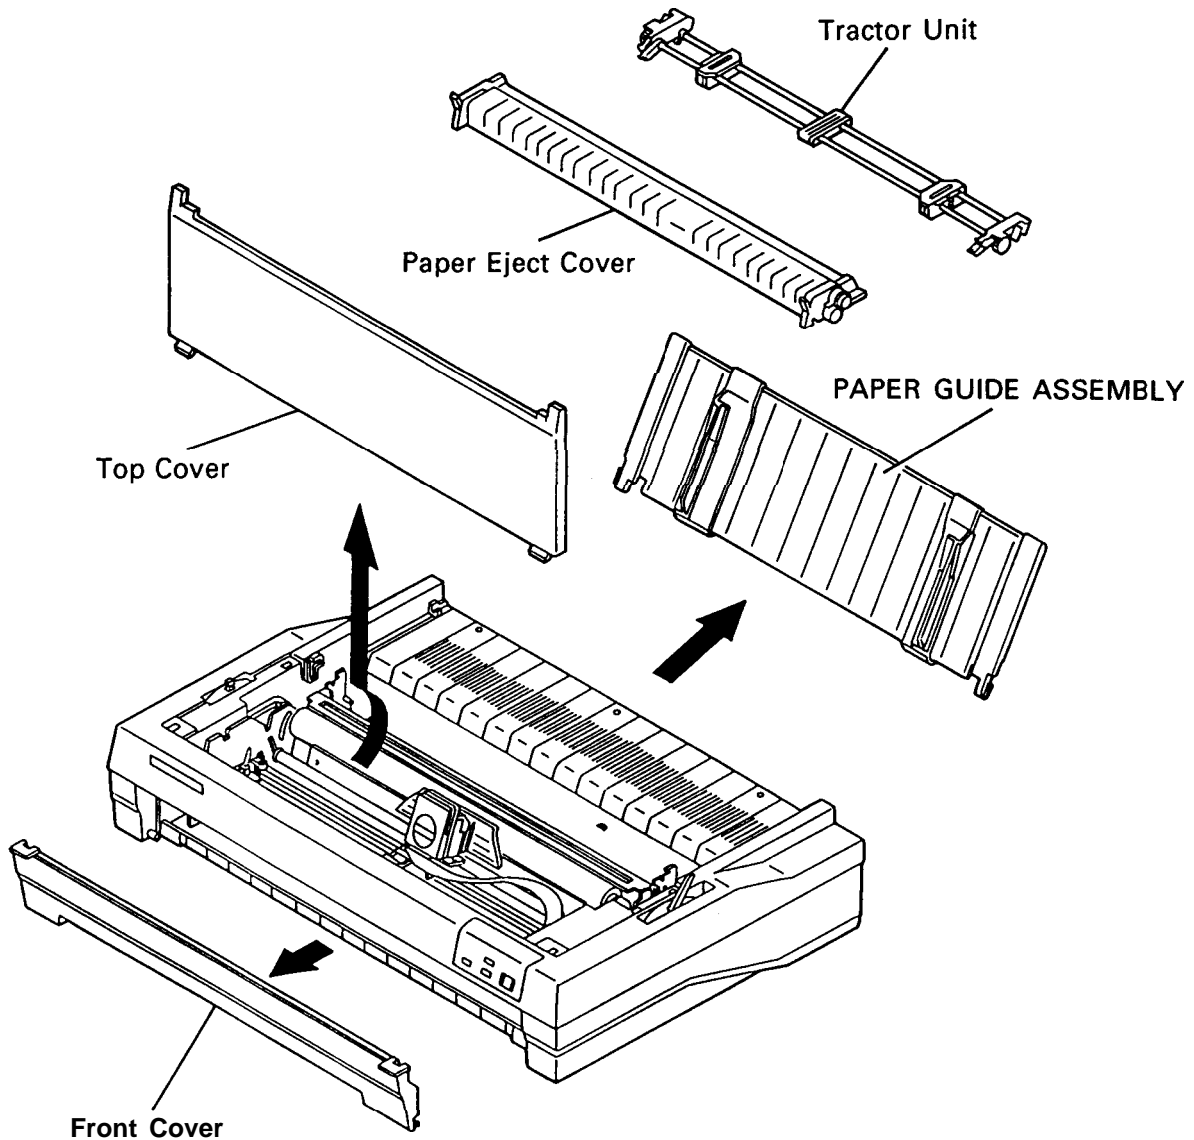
Removing the PAPER GUIDE ASSEMBLY
